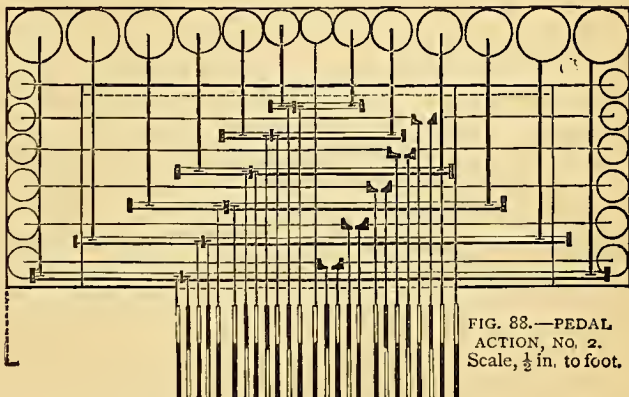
PEDAL ACTION, NO. 2. Scale, 1/2 in. to foot.
